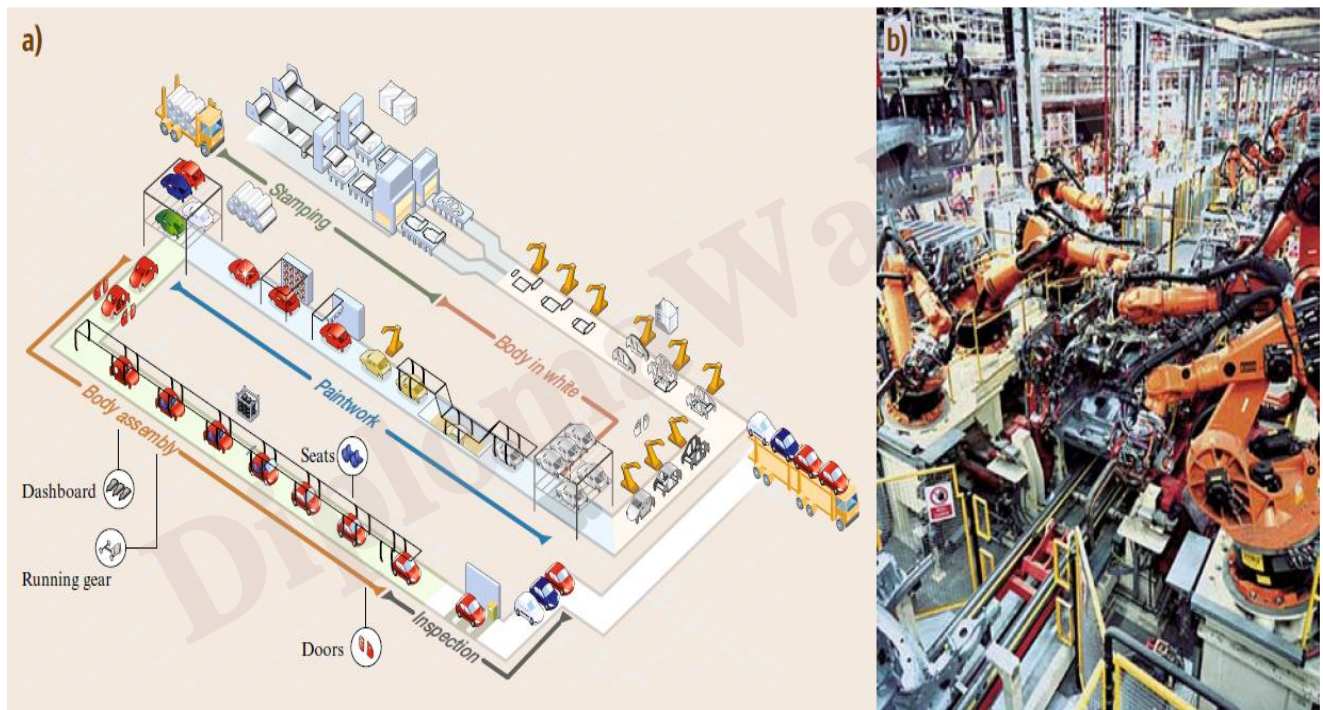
Car body assembly. (a) A car assembly usually follows the illustrated steps: Stamping of the metal sheet into plates, fixing and alignment of the plates on trays, spot welding, painting the car body and finally assembly of the car body (doors, dashboard, windscreens, power-train seats and tires). Car factories can host well over 1000 robots working two to three shifts per day. (b) The Mercedes A class assembly in Rastatt Germany is highly automated. The picture shows spot welding robots along the body in white transfer line.
